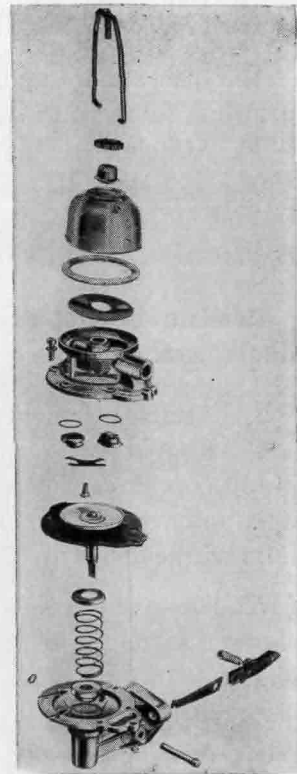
Disassembled view of fuel pump in Fig. 9-13. (Plymouth Division of Chrysler Corporation)
